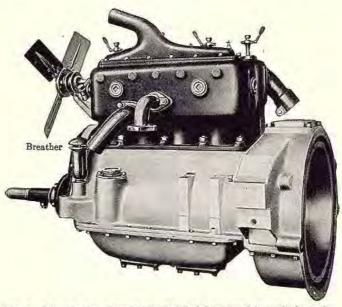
Left side view of model "N" Red Seal Continental four-cylinder engine.
